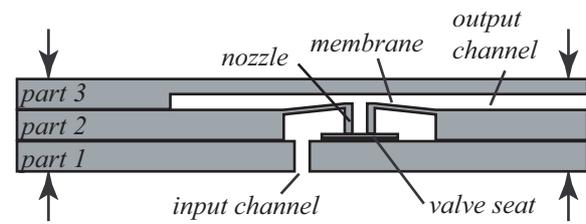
A scheme of the cross-section of the micro safety valve after assembly. The arrows represent the packaging pressure.
